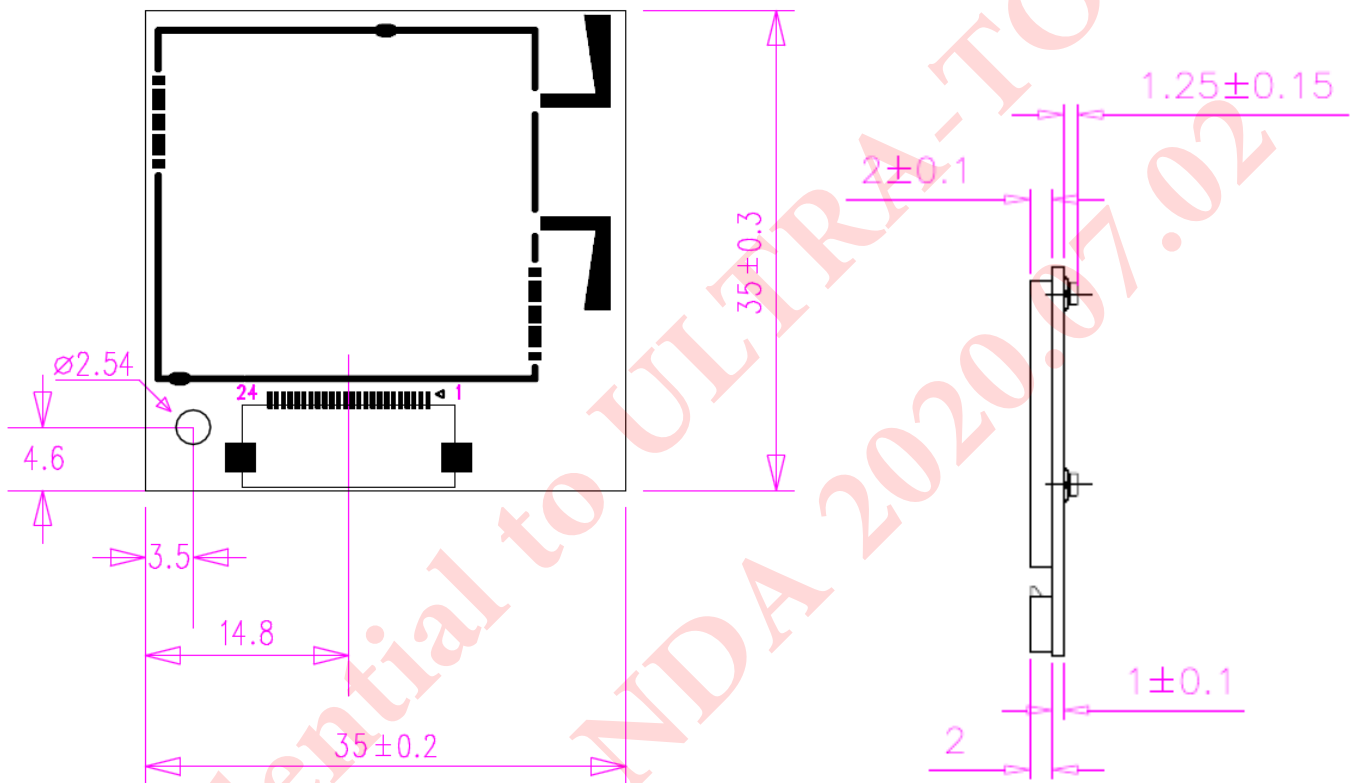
Mechanical Drawing of SY5-A24-F Module with shielding case
